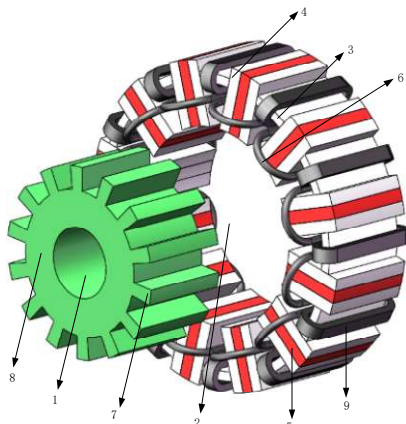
Three-dimensional structure of RFFSPMM 1) rotor, 2) stator, 3) H-type core, 4) stator tooth, 5) permanent magnet, 6) armature winding, 7) rotor tooth, 8) rotor yoke and 9) excitation winding.
